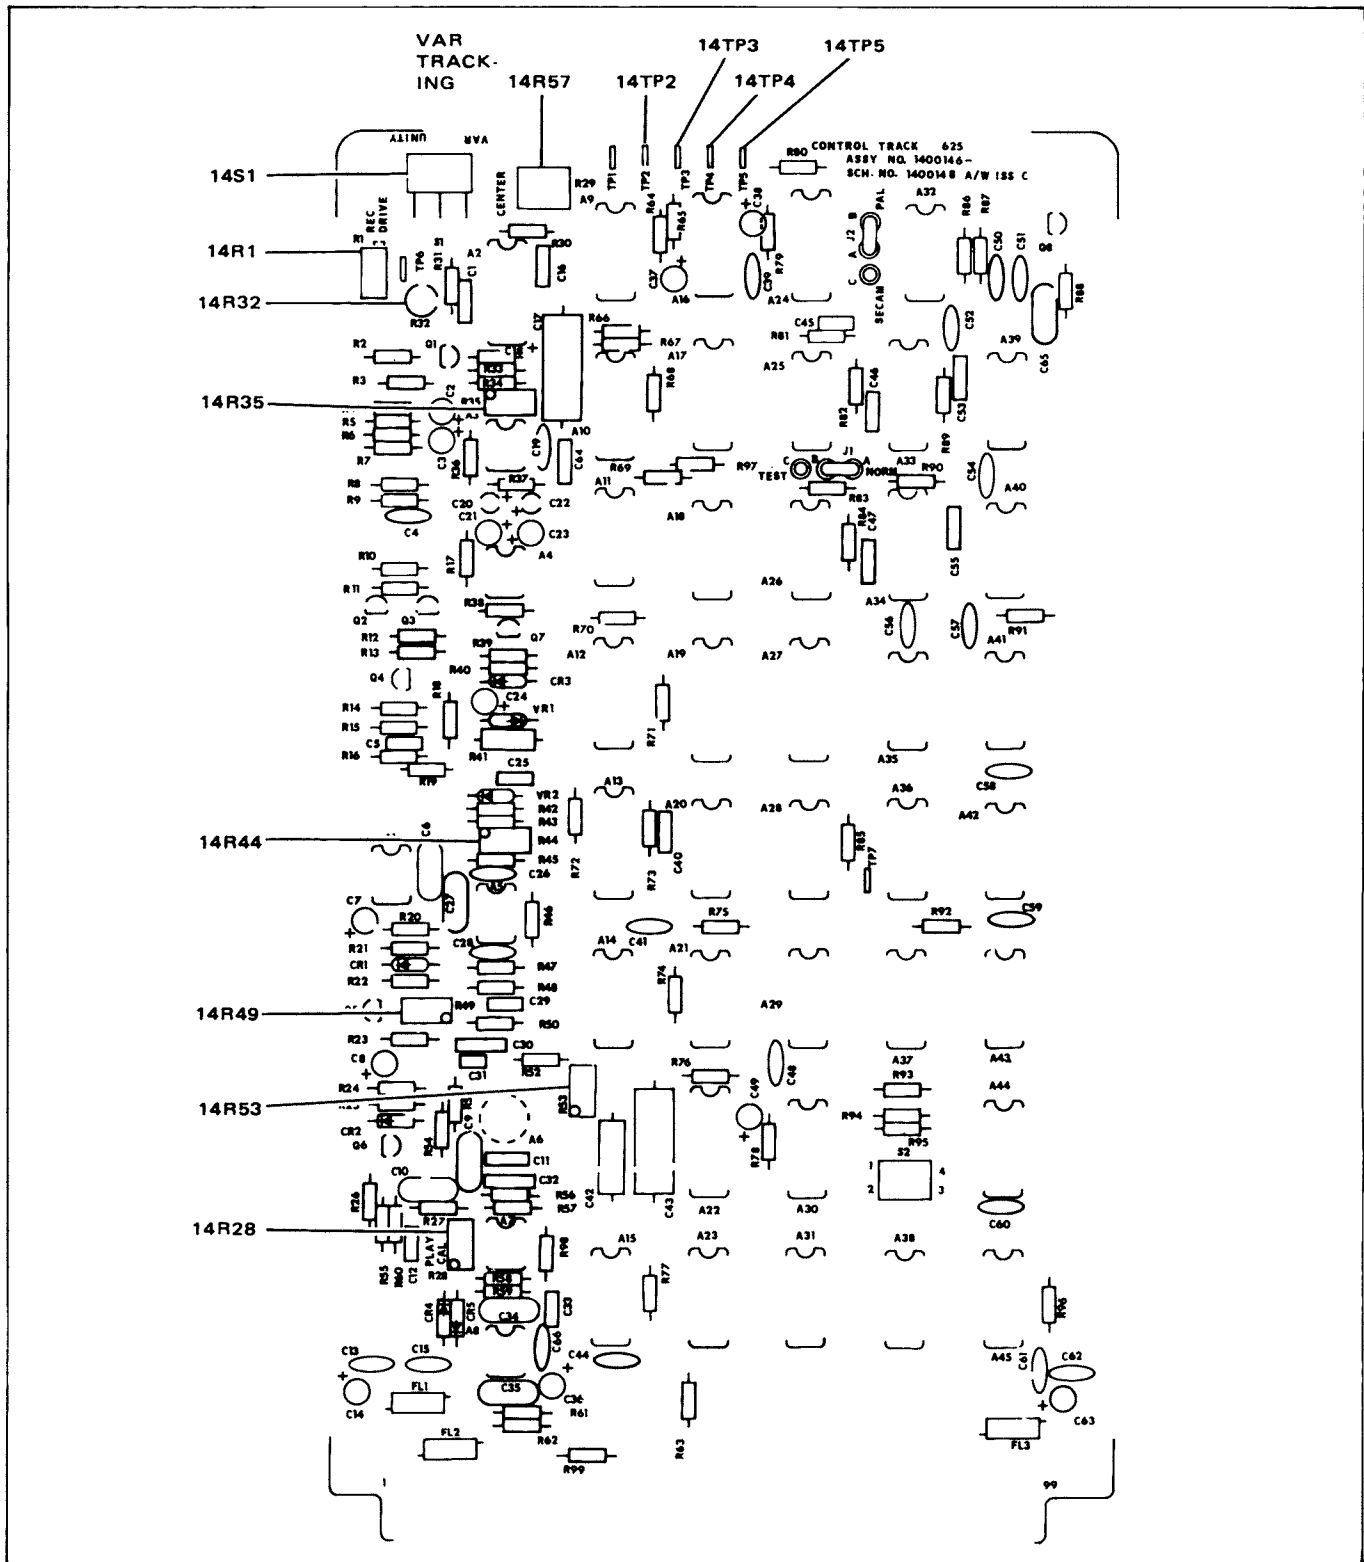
Control Track 625 PWA 14, Assembly No. 1400146
